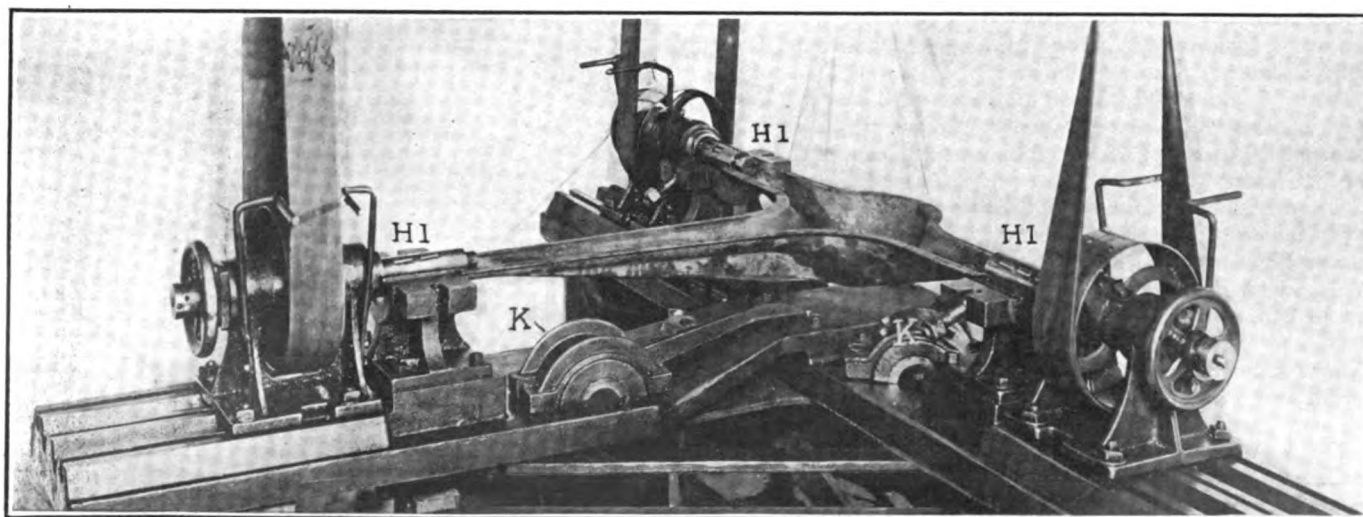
Machine used for simultaneous truing of all three barrel ends of Fiat rear axle stampings
